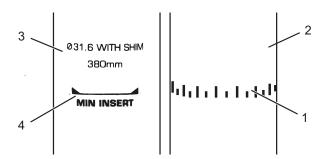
Detailed view of the seat post – examples of the minimum insertion depth marking
